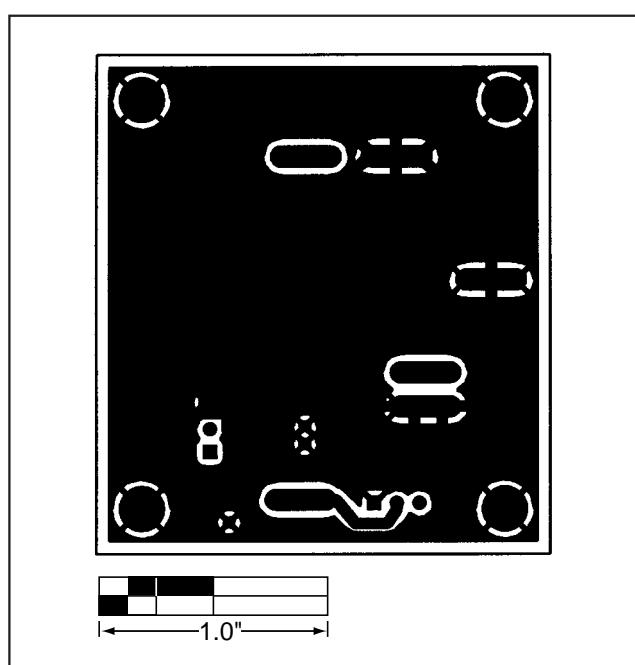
MAX1649 EV Kit PC Board Layout—Solder Side
